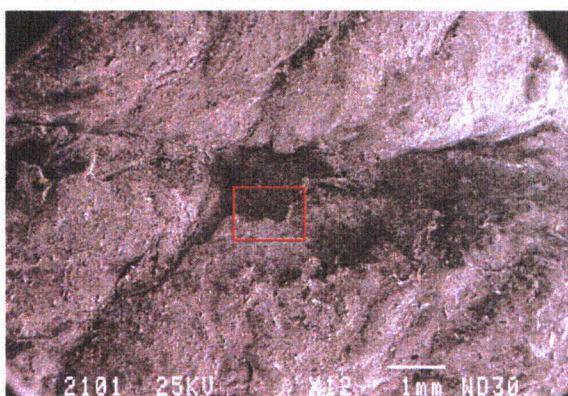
(2) Appearance of fracture surface of channel head body after removal of sample
